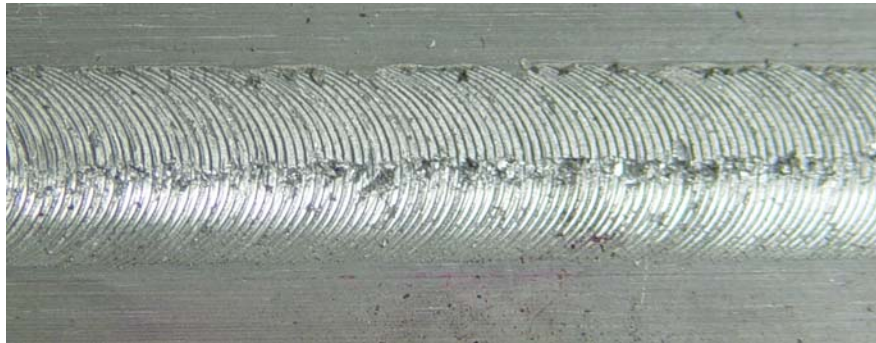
Weld Surface for 6000 rpm and 120 ipm.
